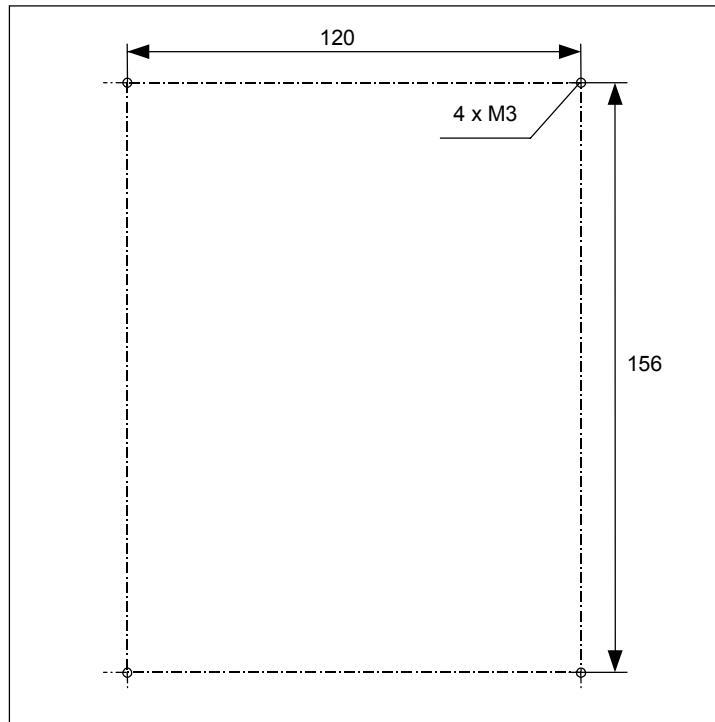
Drill drawing dimensions for the cabinet mounting
